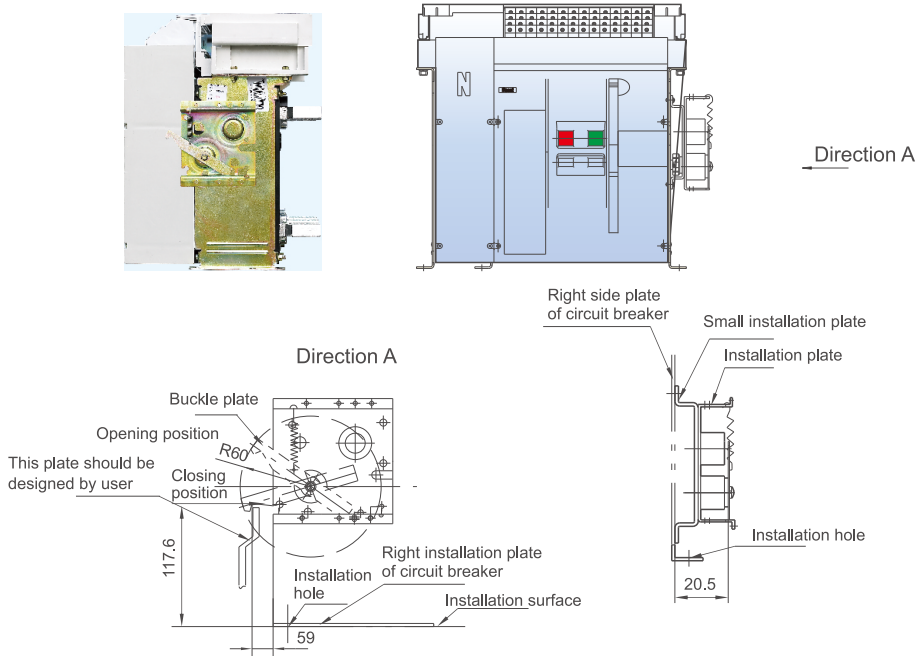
WEW1-1600 fixed type circuit breaker status door interlock installation dimensions
